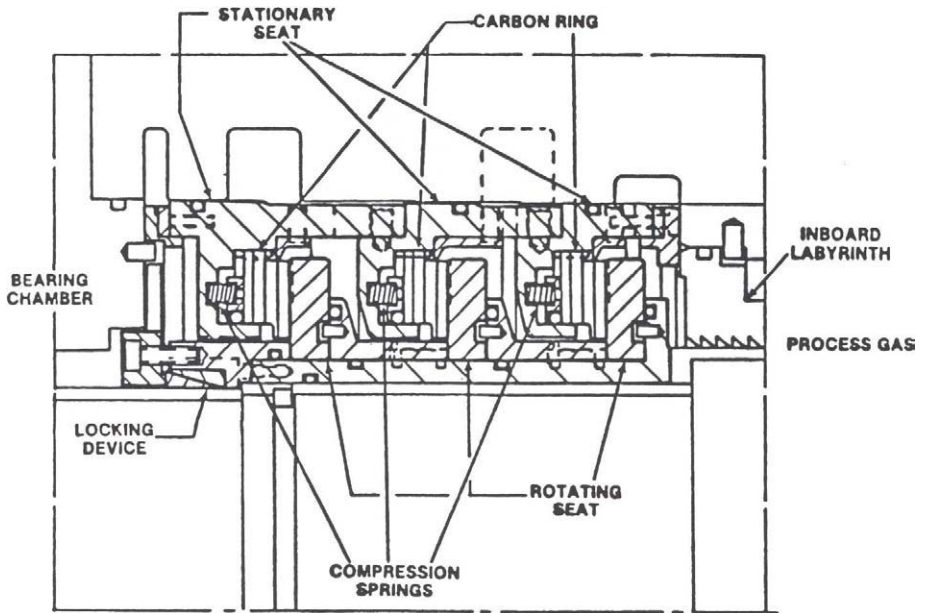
Dry gas seal: tandem dry gas seal arrangement (Courtesy of Dresser-Rand Corp.)
